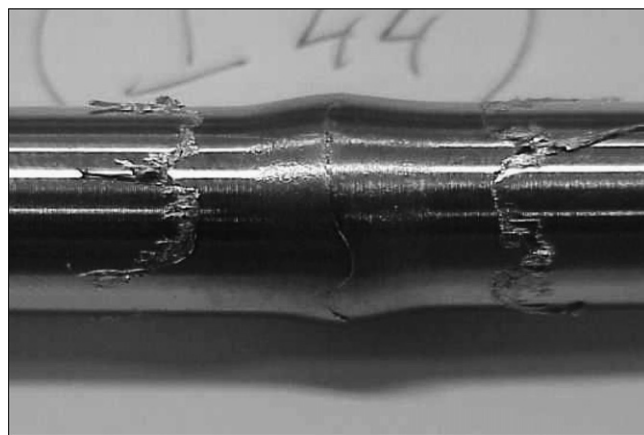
Welded specimen for Ti bars with the multipoint technique.
